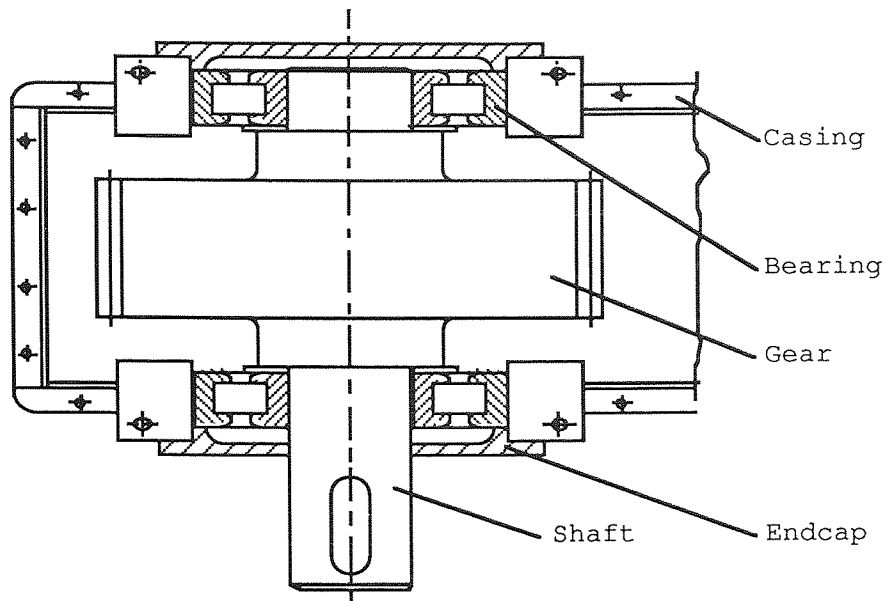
Showing a plan section of one of several shaft assemblies in a typical industrial gearbox
